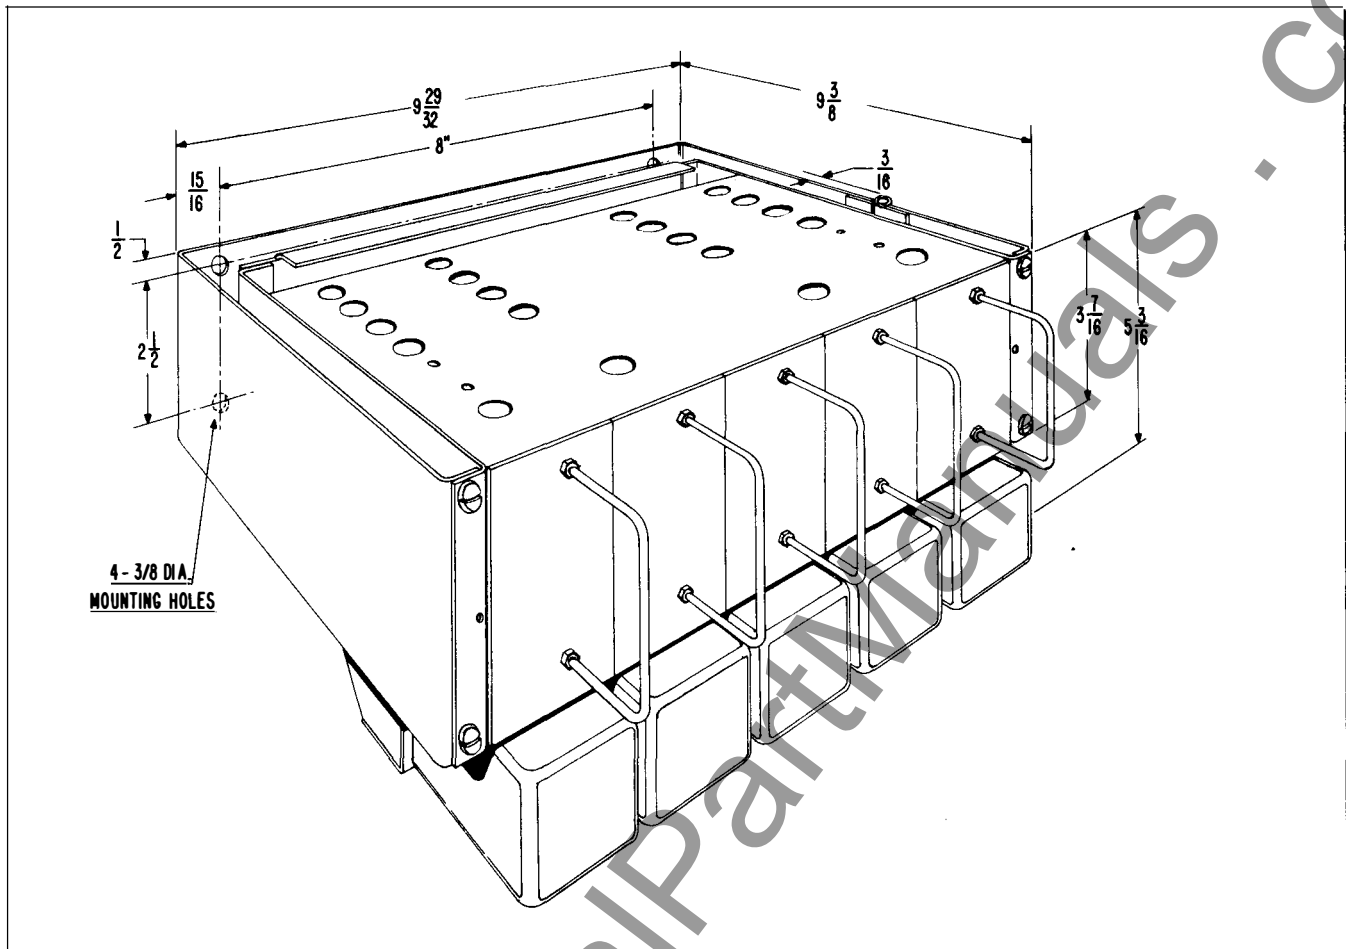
Outline and Drilling Plan of 5 Module Chassis
